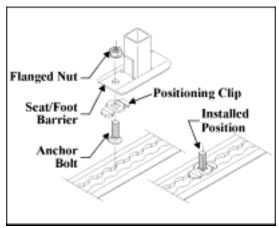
Track-Mounted Passenger Seat Removal and Installation
